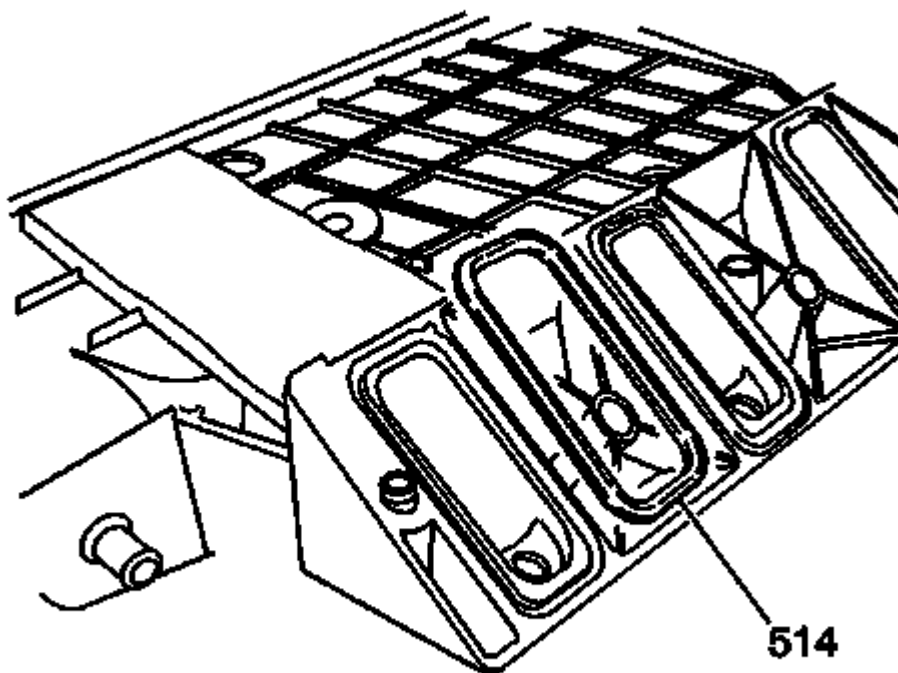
View Of Intake Manifold-To-Cylinder Head Gaskets
